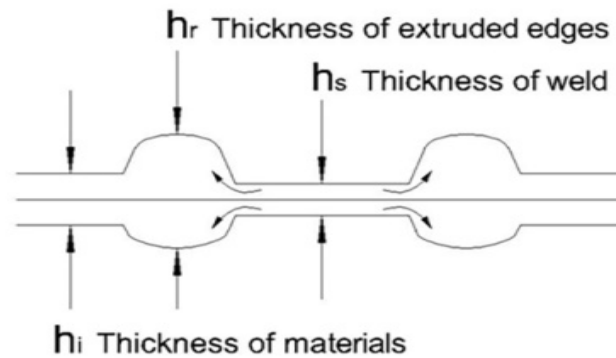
Schematic presentation cross-section of the welded seam showing the characteristic welded seam thicknesses: the thickness of the extruded edges (h_r), the thickness in the welding zone (h_s) and the thickness of the material outside the welding zone (h_i)
